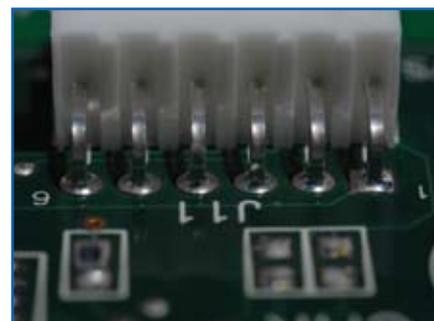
Connector hand-soldered with K100 solder wire using 750°F tip temperature.
